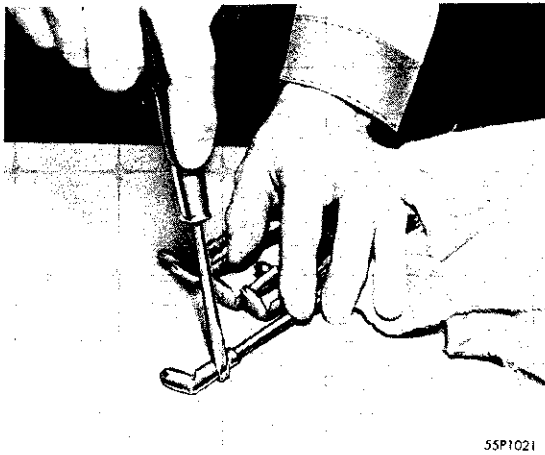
Bending Locking Tab to Remove Clip from Bow
